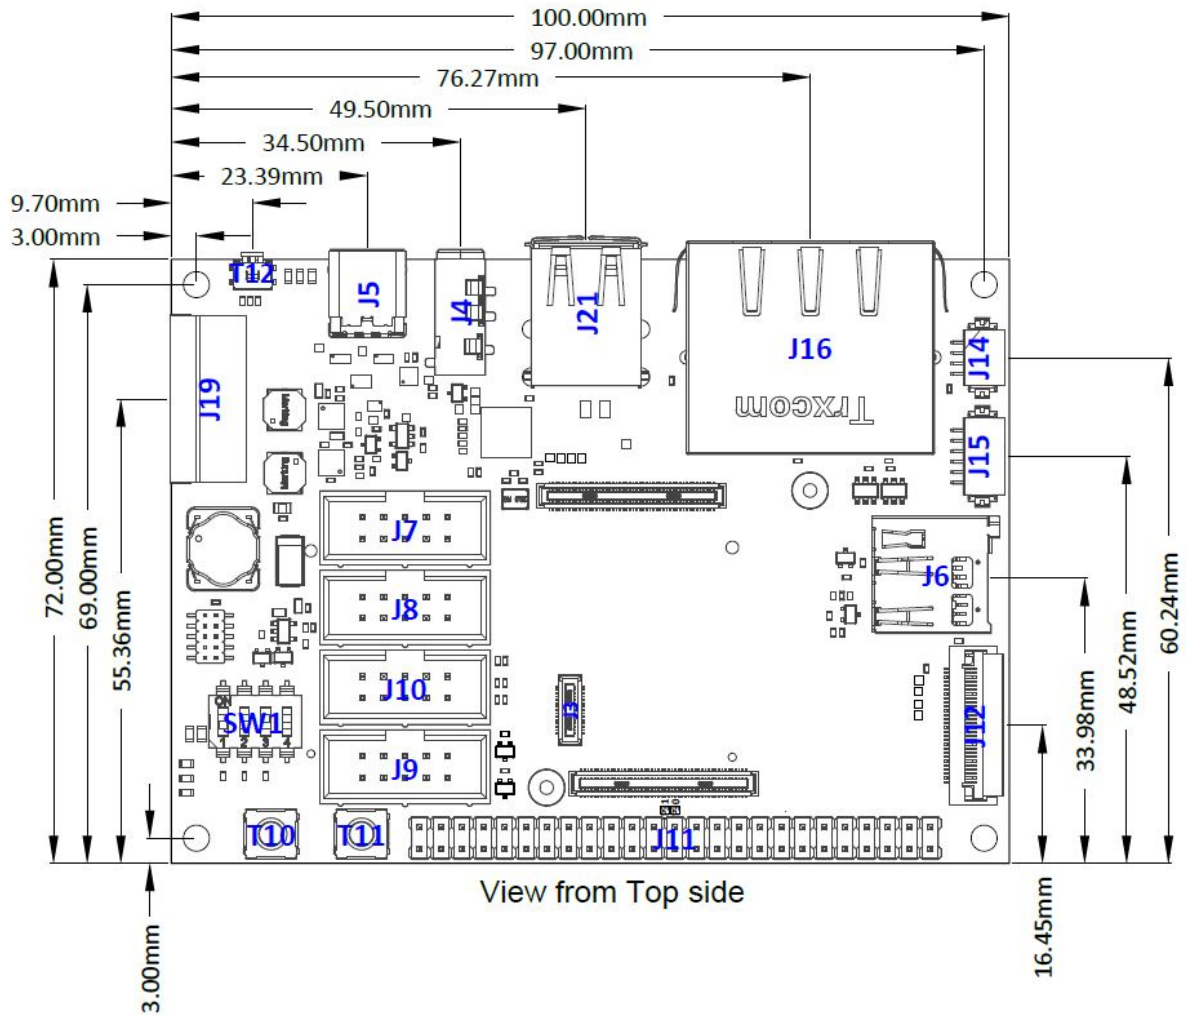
Mechanical Dimensions in mm Rev 1.30 / 1.40
